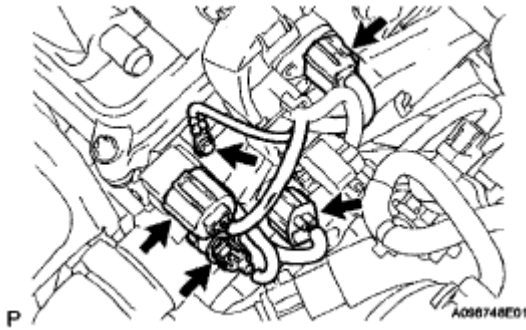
Locating Engine Coolant Temperature Sensor Connector
